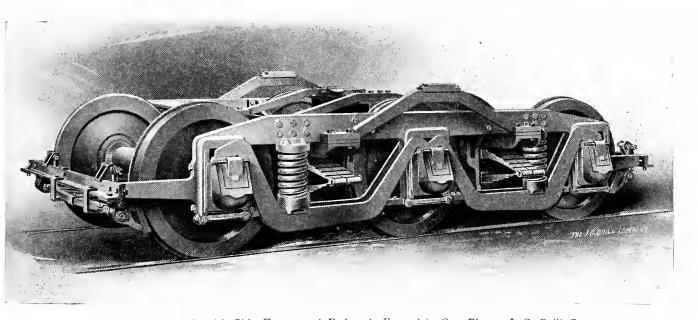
Six-Wheel Truck with Side Frame and Pedestals Forged in One Piece. J. G. Brill Company.
